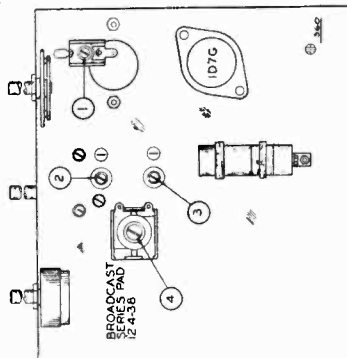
BOTTOM VIEW SHOWING TRIMMERS
